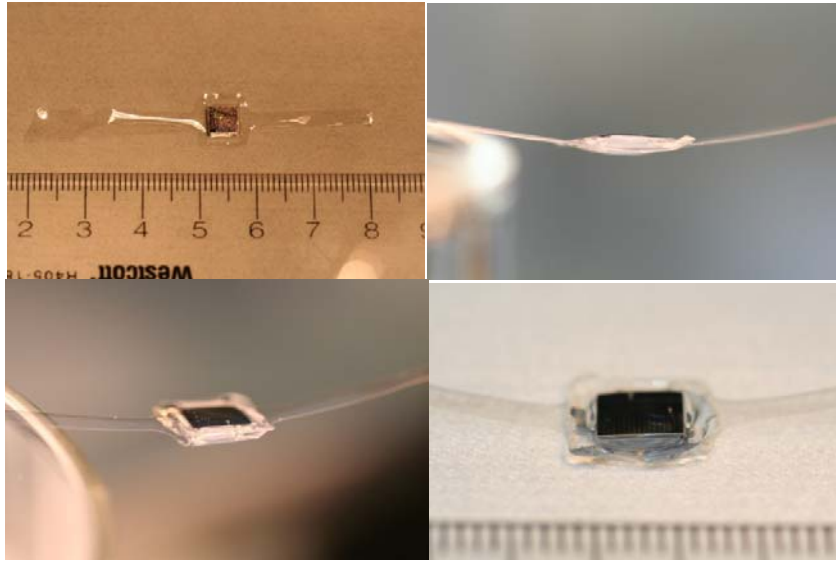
Chip packaging in parylene pocket in mechanical implantation model; (top left) parylene sheet before assembly with chip inserted; (top right) thickness of the chip section is approximately 1.6 mm; (bottom left) parylene pocket after biocompatible silicone coating; (bottom right) the parylene pocket after curing and annealing.
